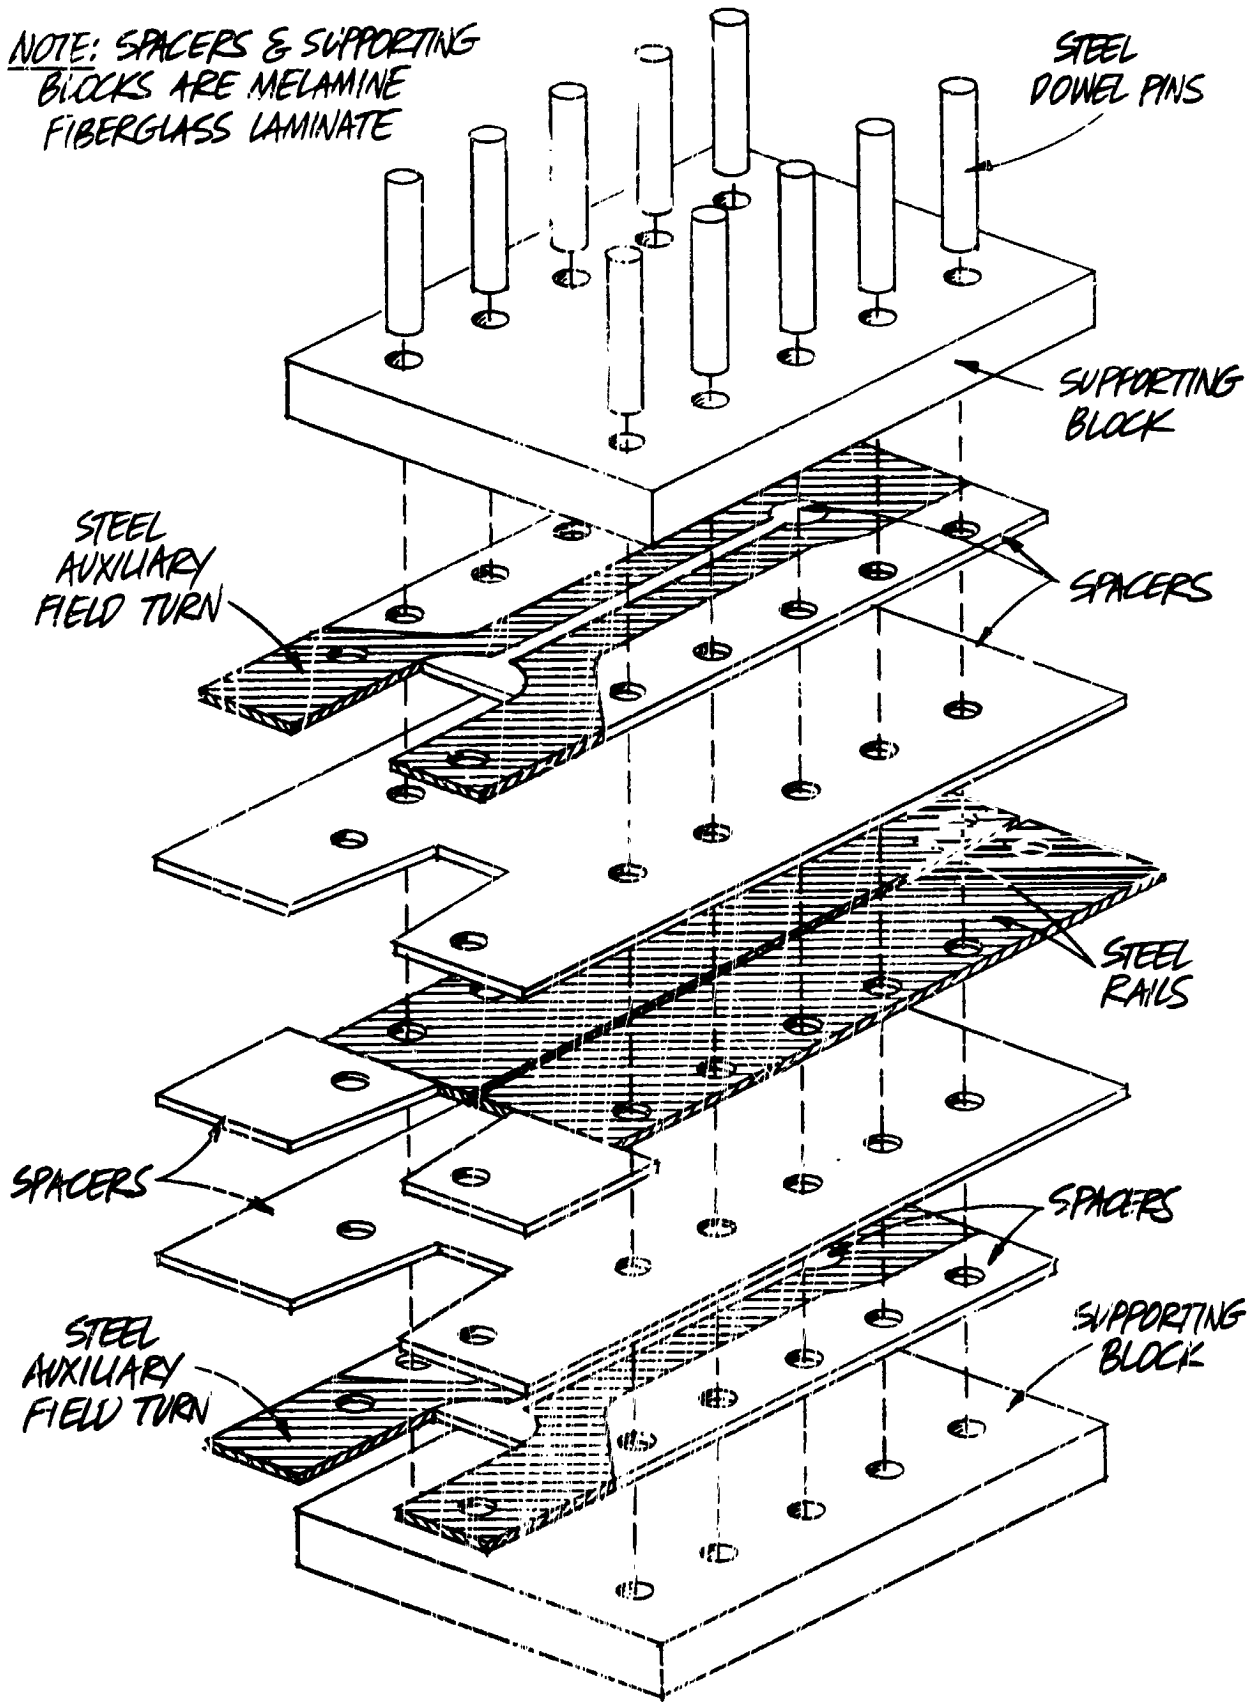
Exploded View of the Rail-Gun with Separate Auxiliary-Field Turns
